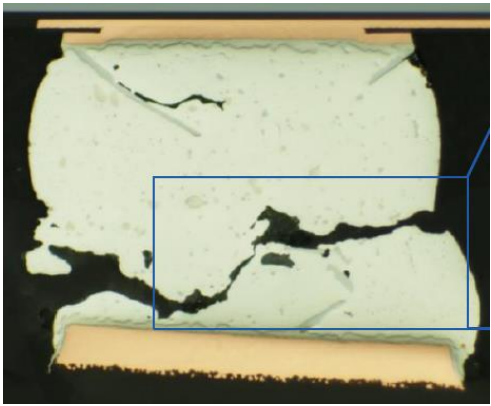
Leg 2 (FS mold + SAC405 ball) solder fatigue crack in the snowman region.
